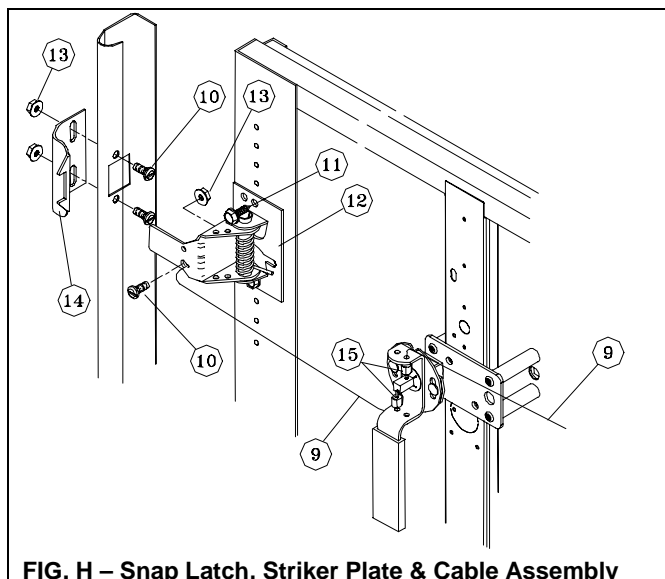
FIG. H – Snap Latch, Striker Plate & Cable Assembly
